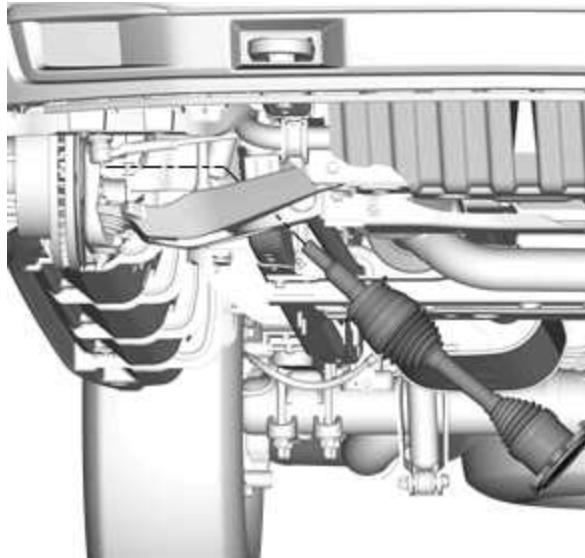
Lower Control Arm Opening Into Steering Knuckle
